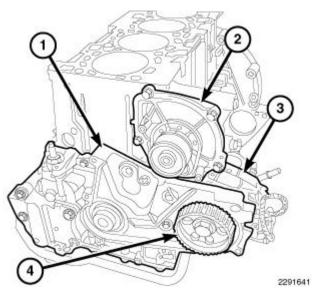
Oil Pump Cover Assembly Courtesy of CHRYSLER LLC
